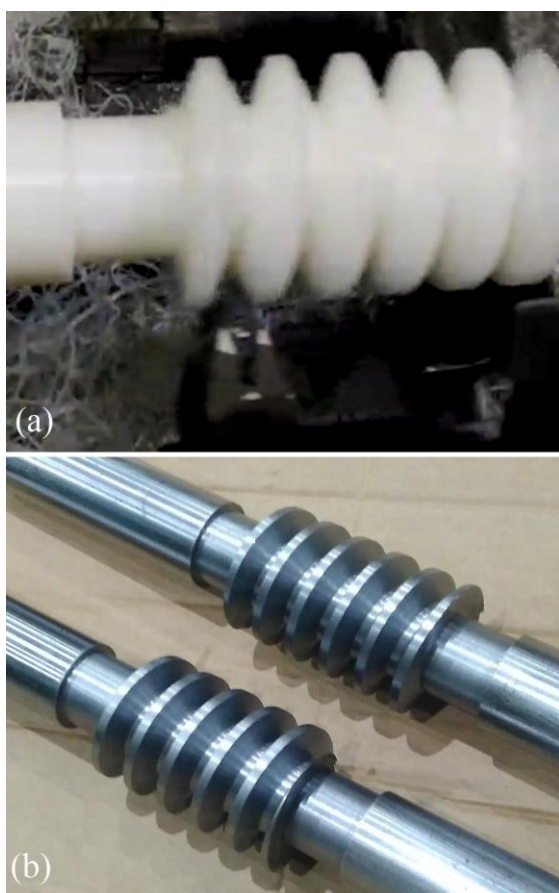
Example of left hand worm screw manufacturing: (a) – process adjustment; (b) – manufactured parts example
